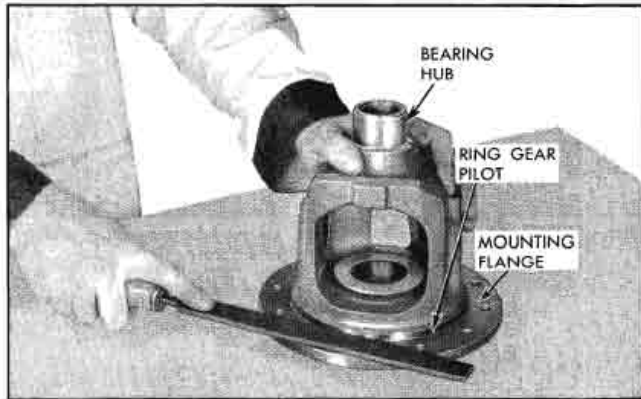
Removing Burrs and Nicks From Mounting Flange
